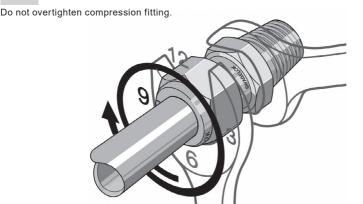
Proper Tightening of the Compression Fitting Nut
